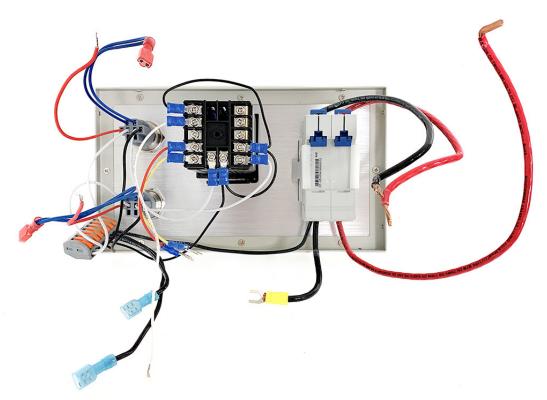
Wire the breaker switch before fit it into the bracket, and continue the wiring for EZboil and hot L1 bus for front plate like the photo.
